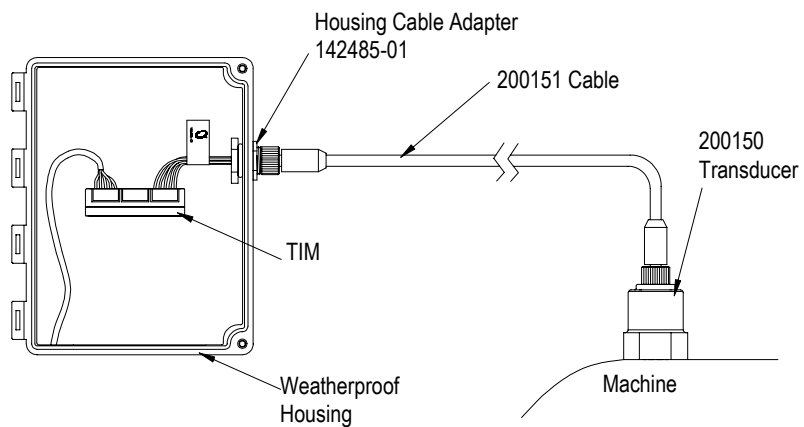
Typical Installation Using 142485-01 Housing Cable Adapter
